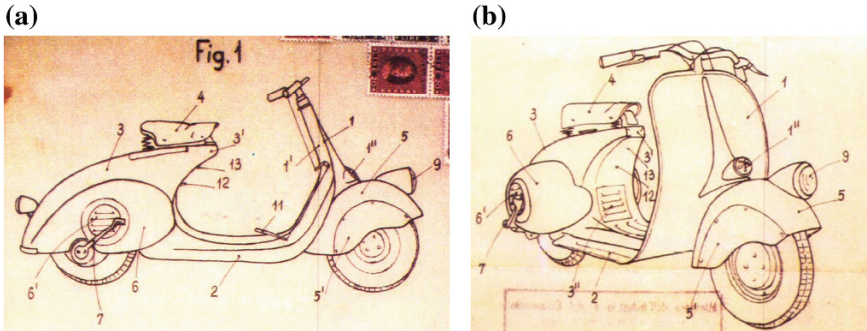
The Vespa design by D'Ascanio from the patent: [6, 7, 9] a drawing of a side view; b drawing of a 3D view
